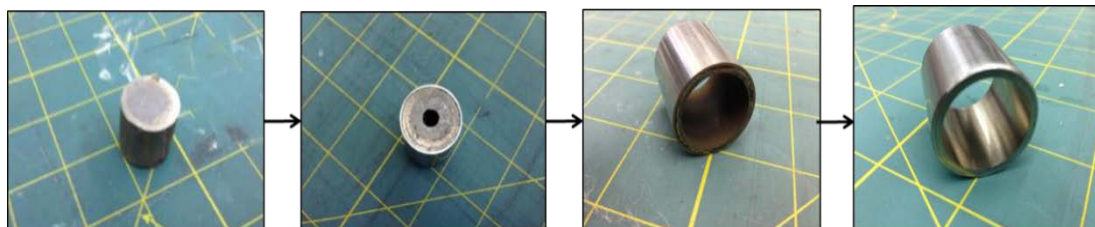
Lined sleeve bearing prototype production showing (from left to right) consolidated cermet, machined and inserted into bearing, EDM bored , white wheel ground/polished final part
